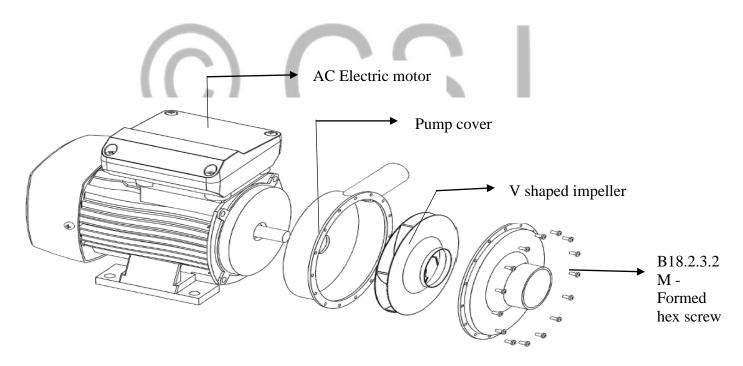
Exploded View of the Fabricated V-shaped impeller pump.
